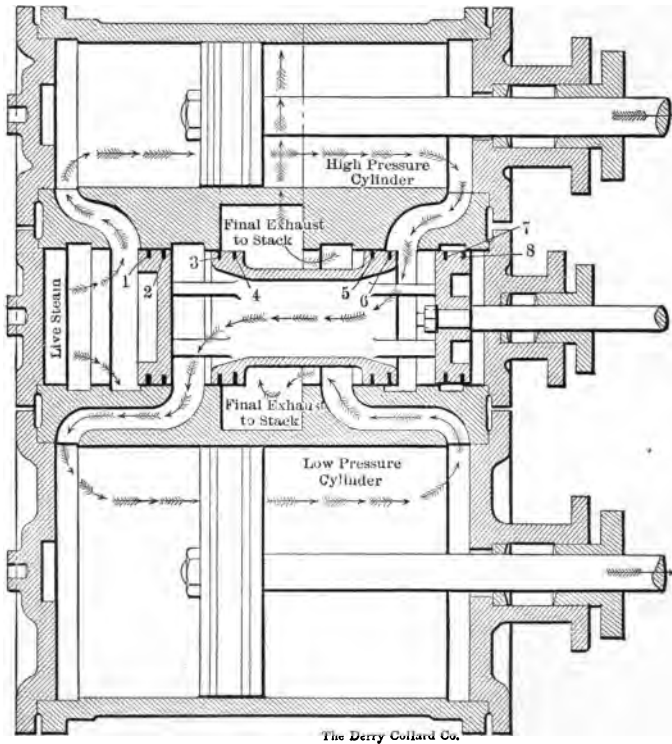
Cylinders and valve of Baldwin or Vaclain four-cylinder compound.
